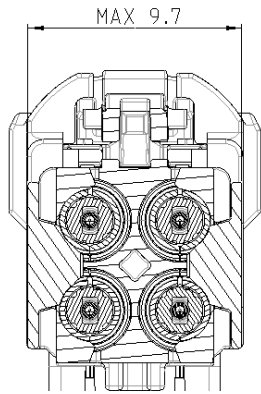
MAXIMUM DIMENSION WHEN TPAs ARE IN ENDLOCK POSITION
